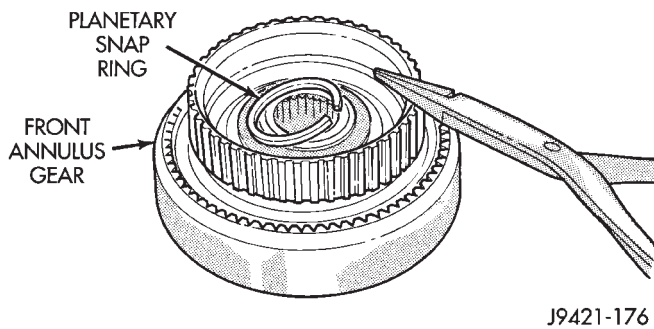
Front Annulus And Planetary Assembly Removal
